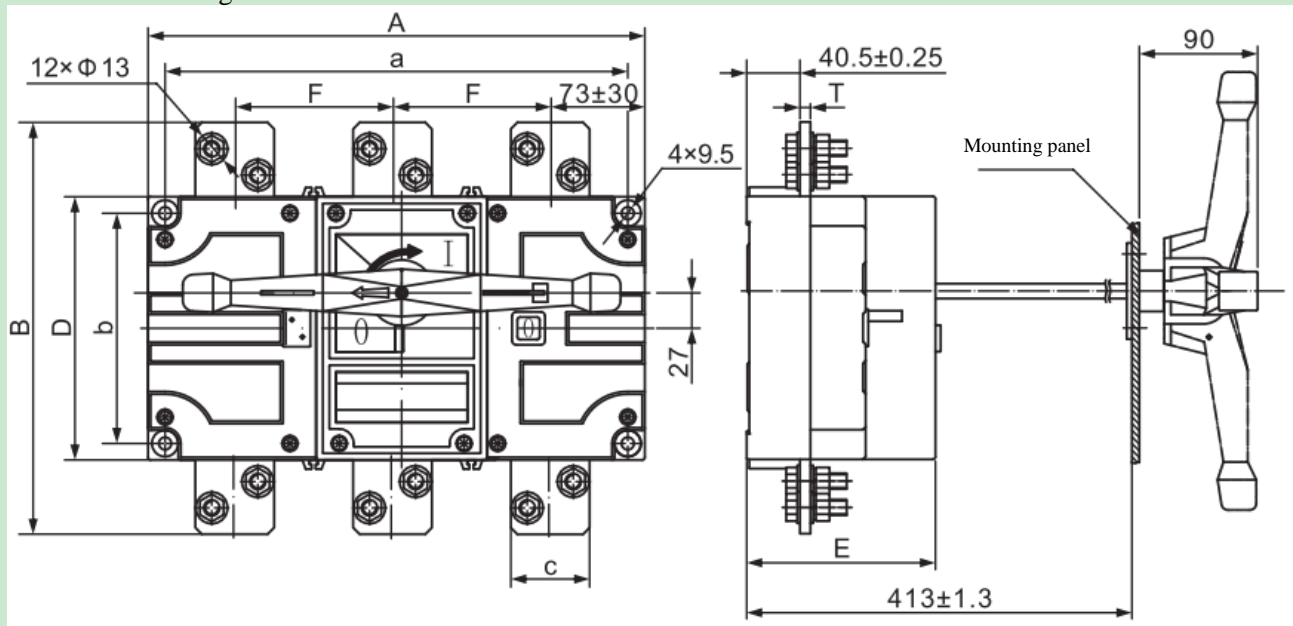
Installation dimension drawings of HGL, HGLi – 1000 (800) ~ 1600 series switch disconnector out of the cabinet
